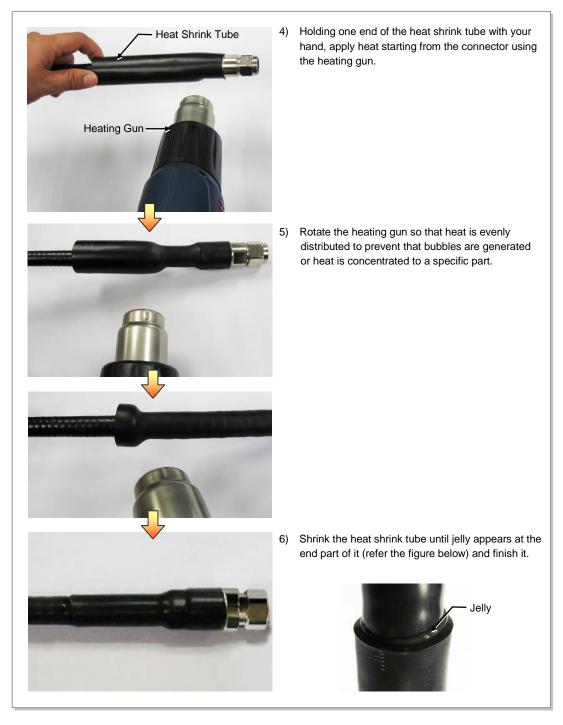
Shrinking the Heat Shrink Tube-Feeder line (2)
